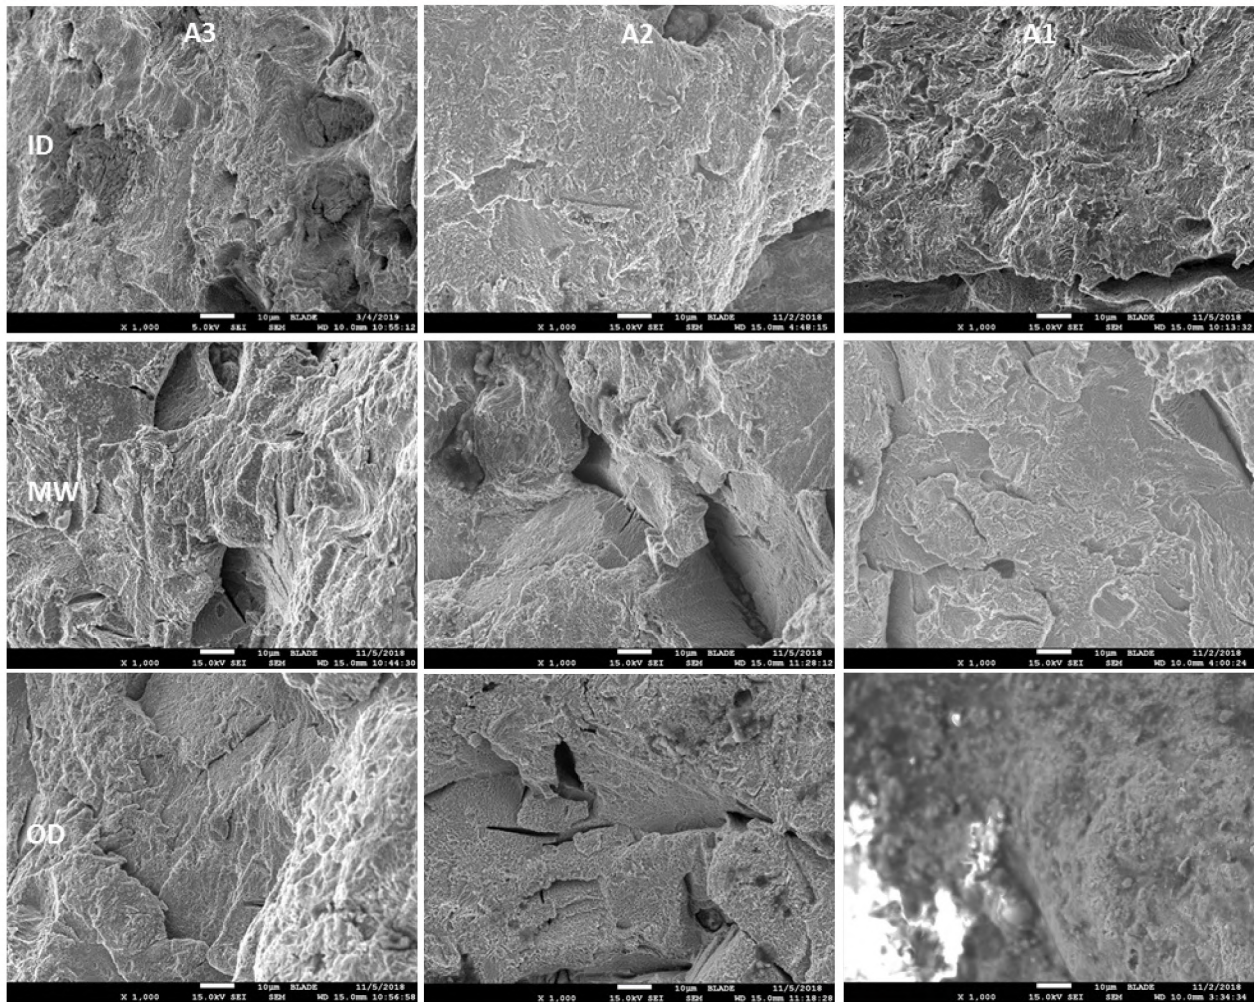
Fracture Surface Morphologies near the ID, MW, and OD Taken at 1,000×
